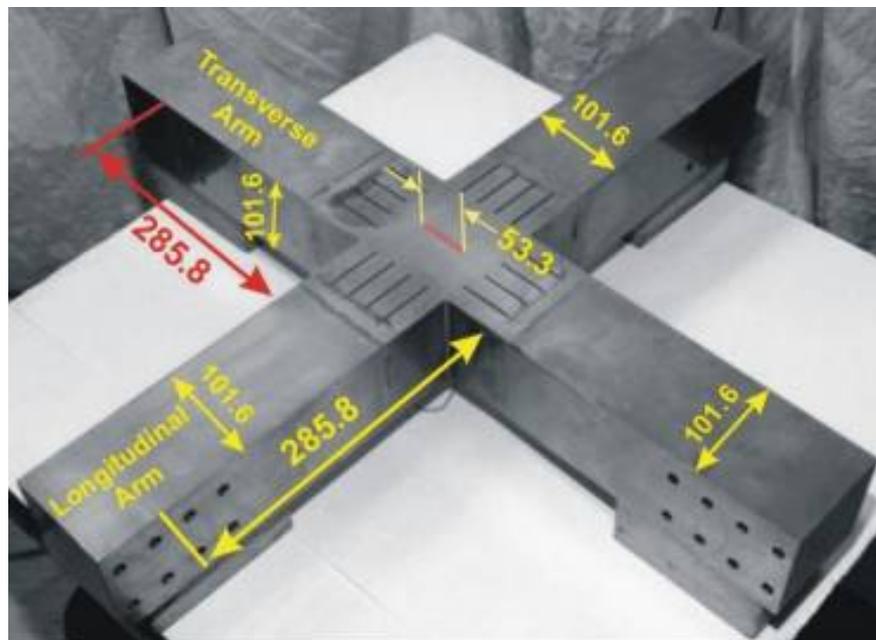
The completed cruciform test piece (dimensions in mm's).
